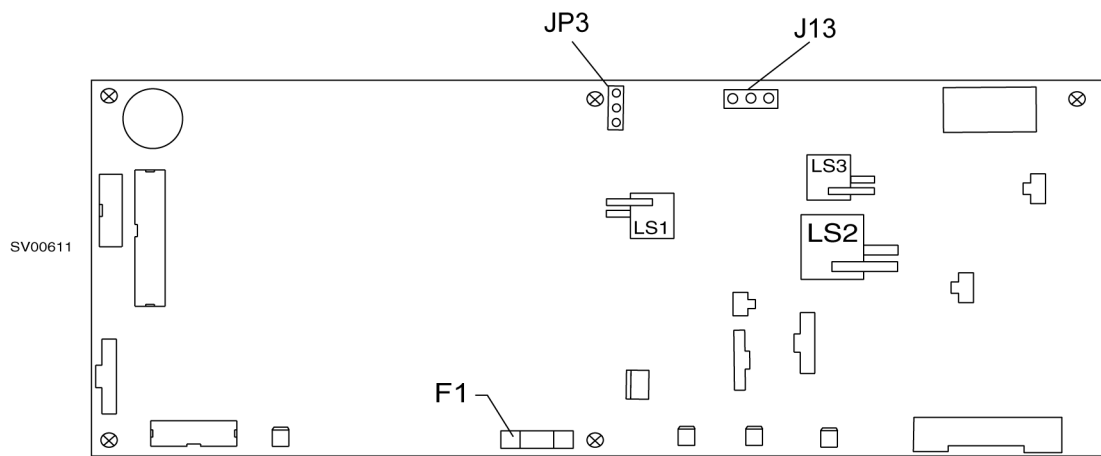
Boot Strap Jumper and Download Connections on Control PCB P/N 4118079
